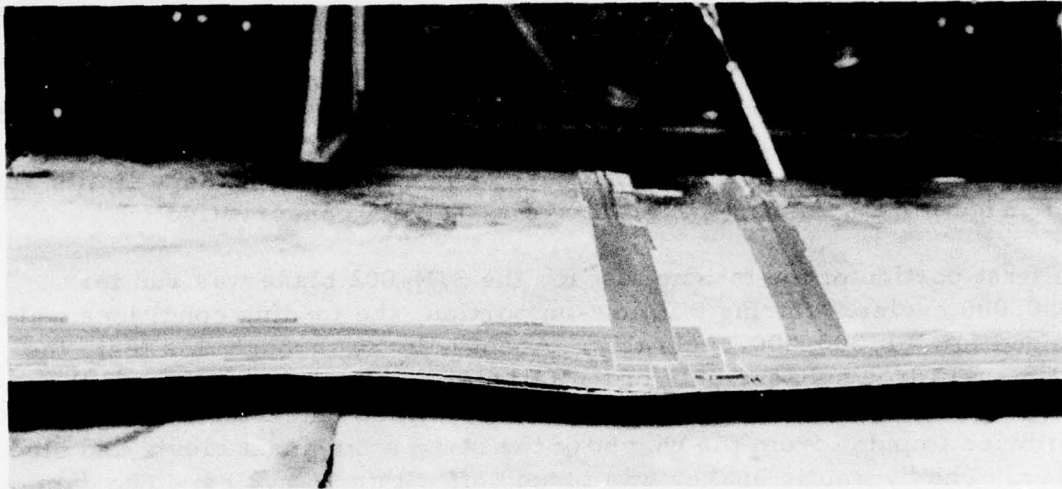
S/N-002 MTS blade damage resulting from fatigue fixture accident.
